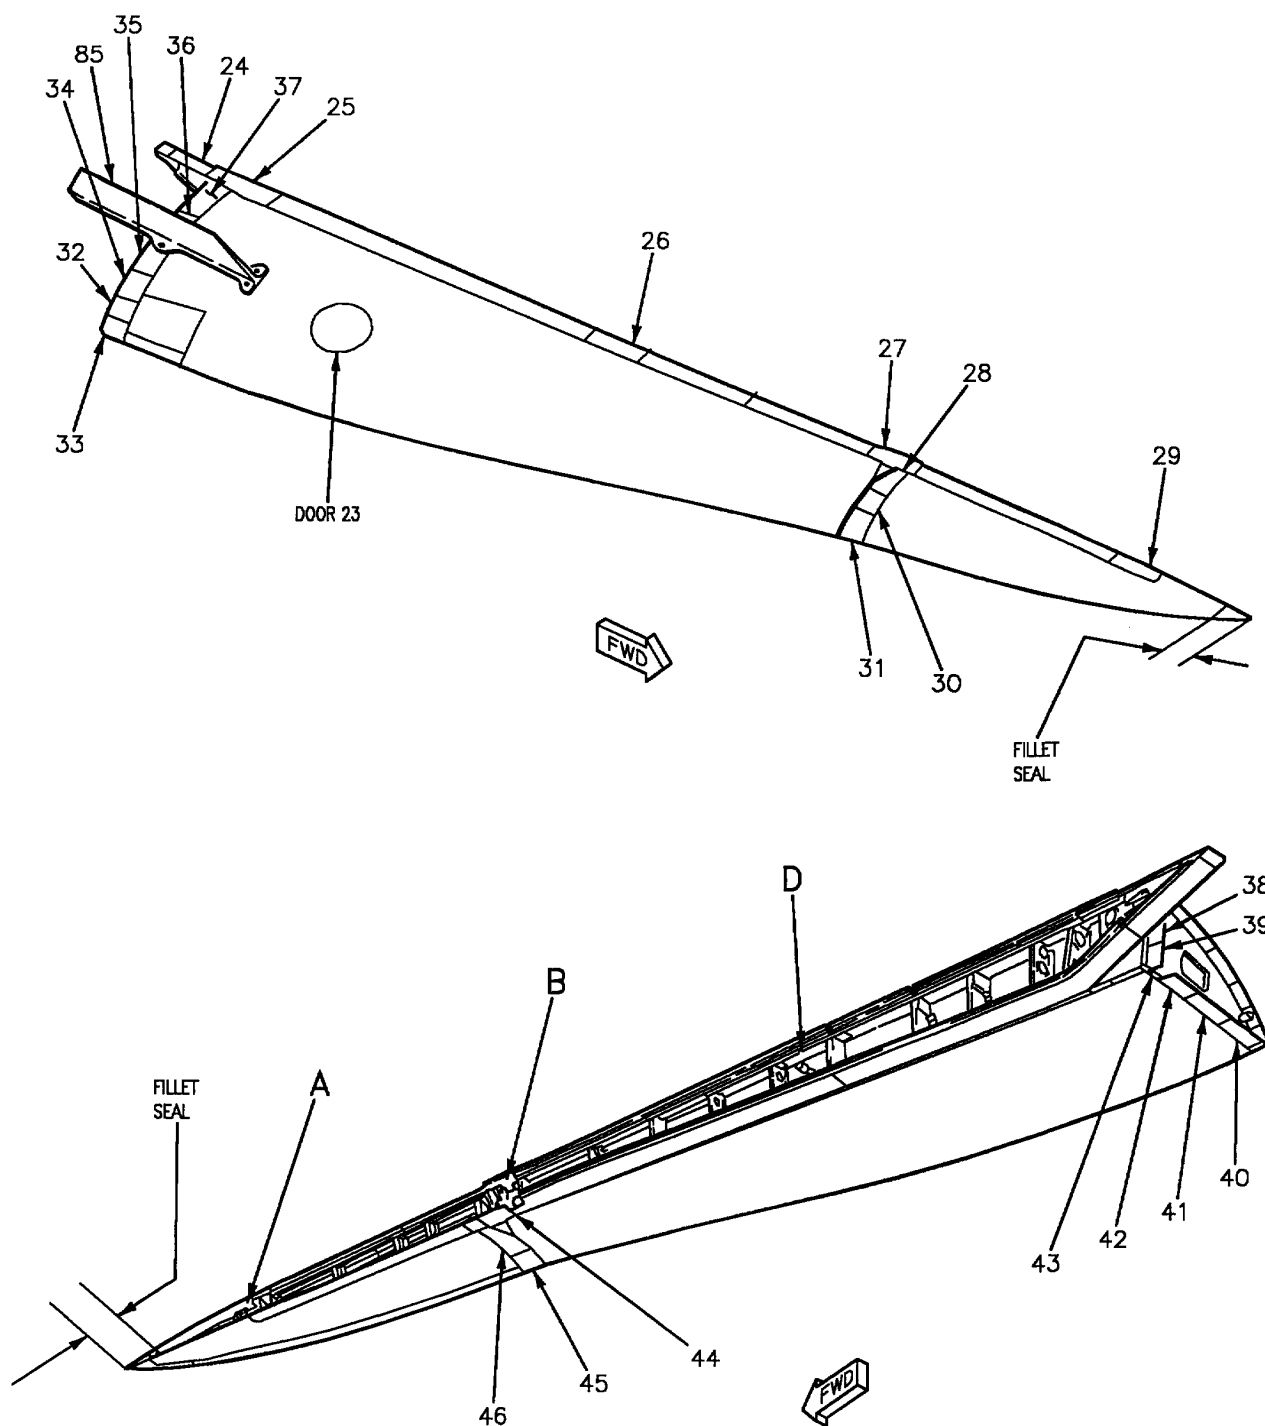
Leading Edge Extension Removal and Installation (Sheet 2)
